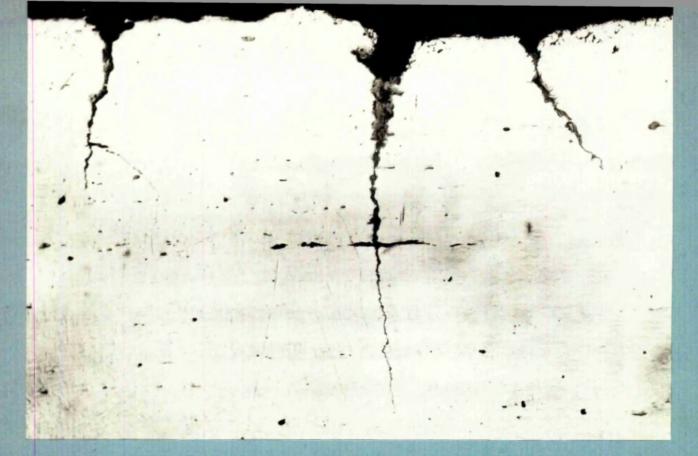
CORROSION FATIGUE CRACKS SHOWING DIVERGENT PATHS (x 70)
